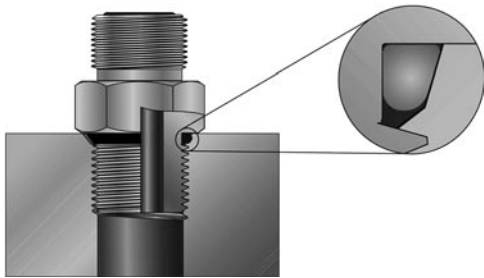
SAE / ISO / JIS B2351 Straight Thread Port O-Ring Upon Assembly
